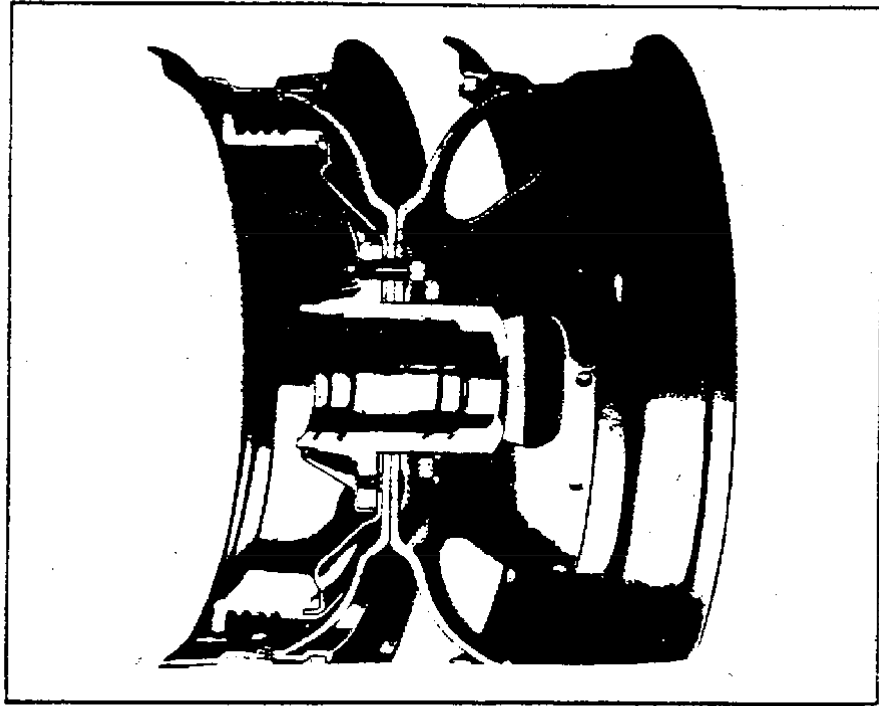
Dual Disc Wheels, Three-Piece Lock Ring, with Nut and Plate Securement
